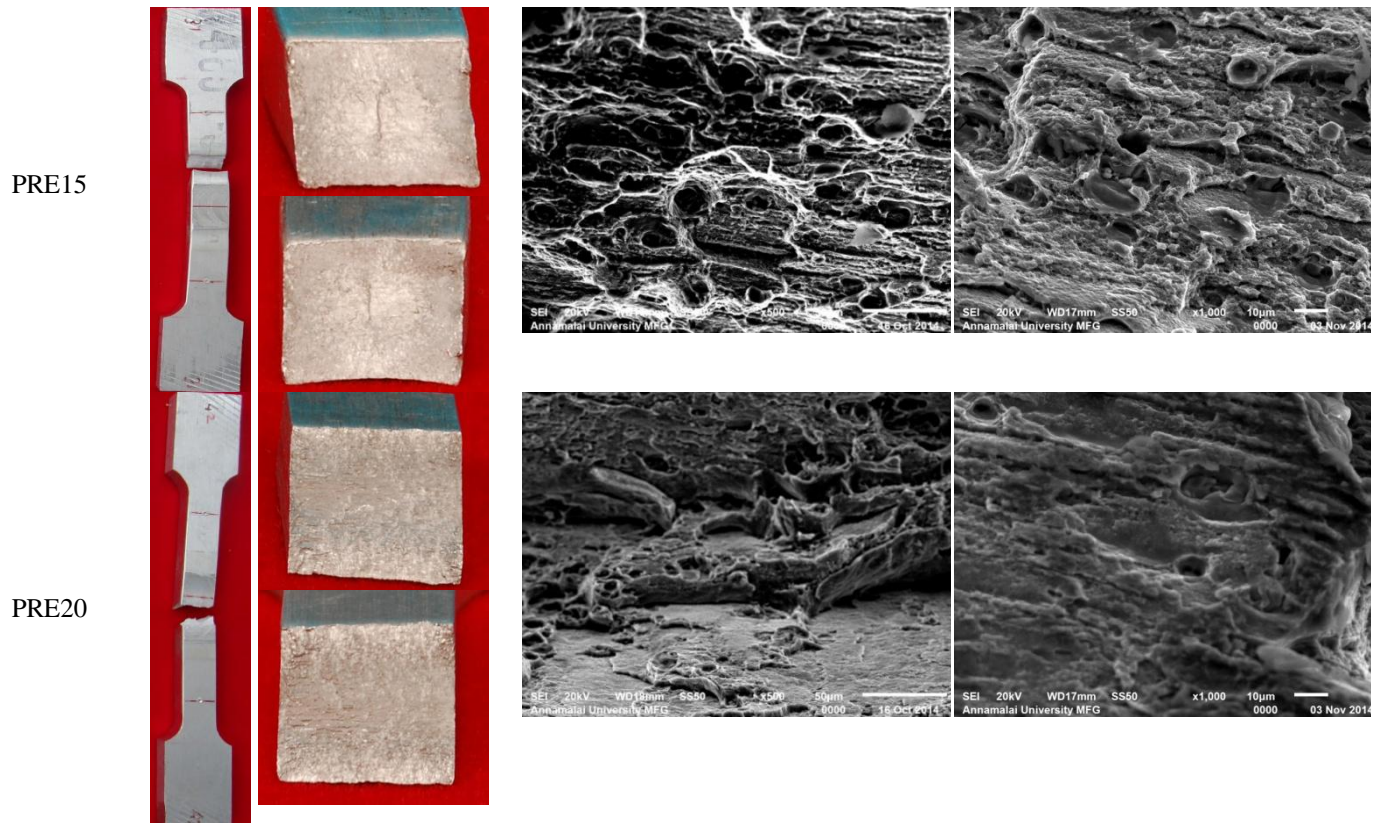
Fracture location and corresponding Fracture location microstructures of unnotched tensile specimens
